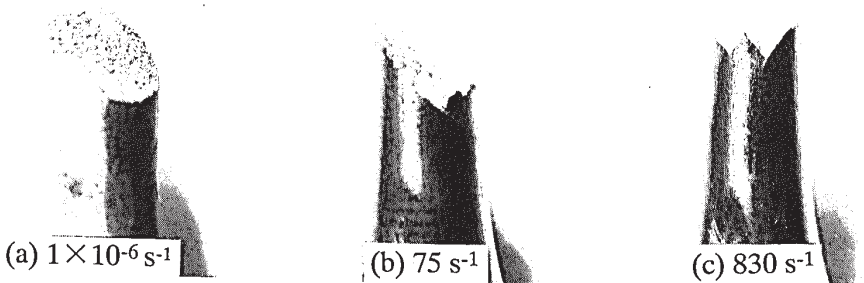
Fracture surfaces obtained at strain rate of $1 \times 10^{-6} \text{ s}^{-1}$, (a), 75 s^{-1} , (b), and 830 s^{-1} , (c).
